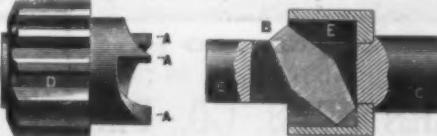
SECTIONAL VIEW OF AXLE, SHOWING RELATIONS OF CLUTCH AND WHEEL.
